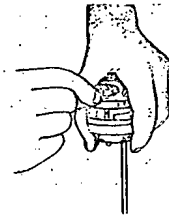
FITTING ARMING PIN THROUGH PORT IN ROD OF EJECTION GUN FIRING MECHANISM STRIKER
